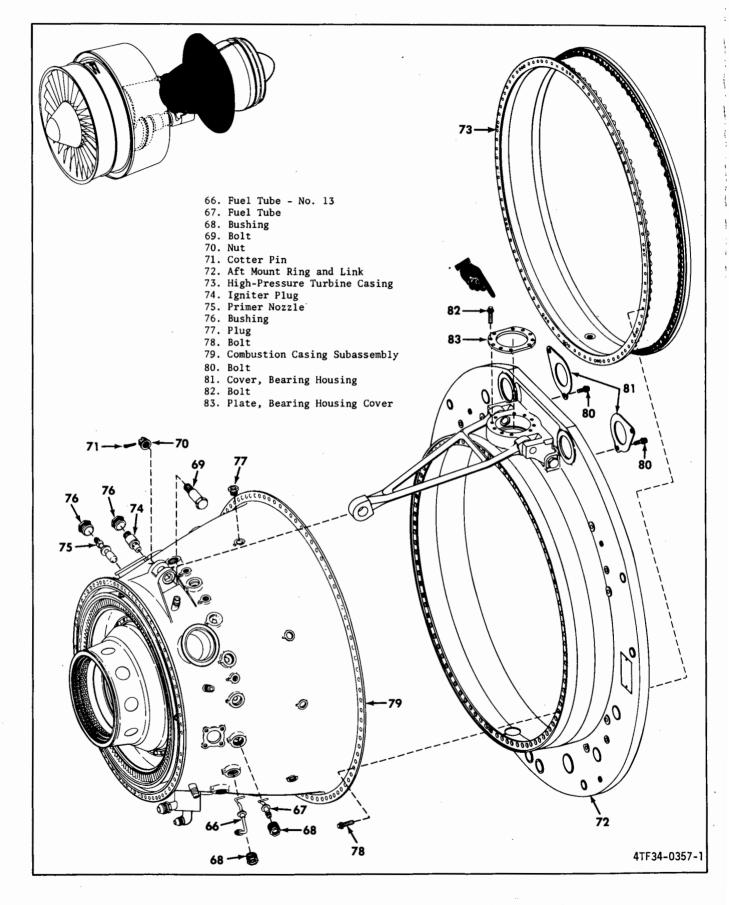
Assembly of Combustion Chamber Module (Sheet 4 of 4)
